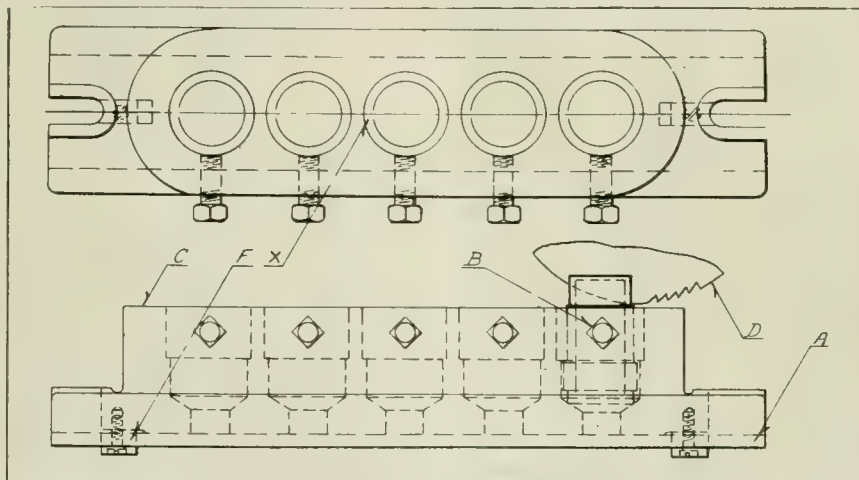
FIXTURE IN WHICH SLOTS ARE MILLED.
